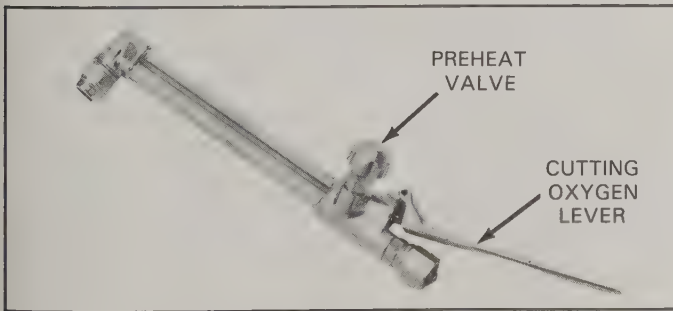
The cutting attachment is threaded to fit on the end of the torch handle (in place of a brazing tip). The preheat valve allows adjustment of the oxygen for the preheat flames. The cutting oxygen lever, when squeezed, permits a strong flow of oxygen through the center hole of the cutting tip. This helps melt or burn away the metal being cut.
